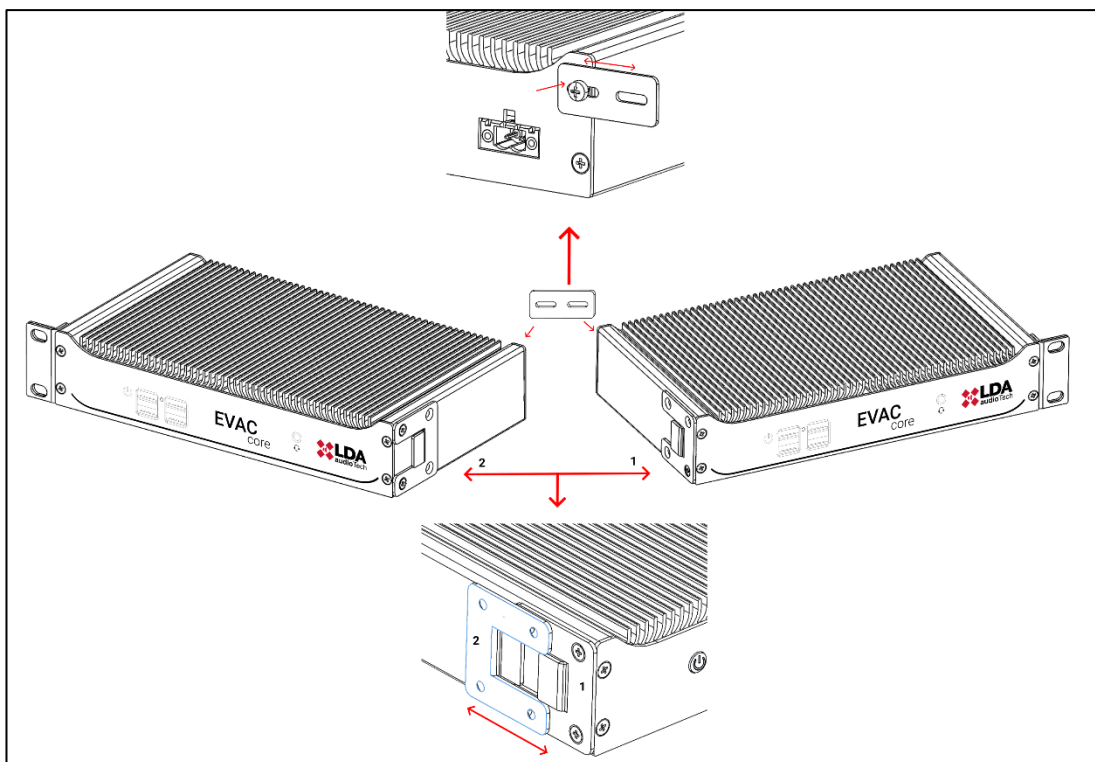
Scheme of joint rack mounting of two EVAC Core devices.
